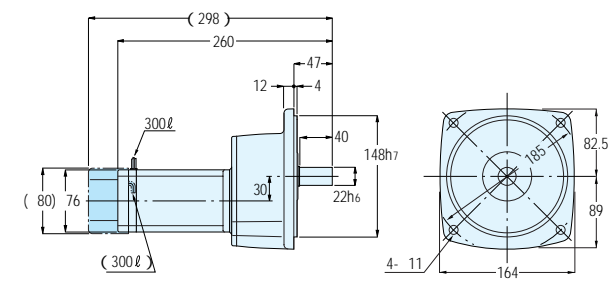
GILM-32-4 ~ 12/16 ~ 24-T25
